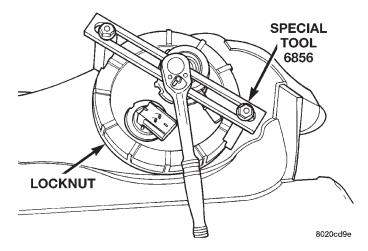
Fuel Reservoir Module Lock Nut Removal
